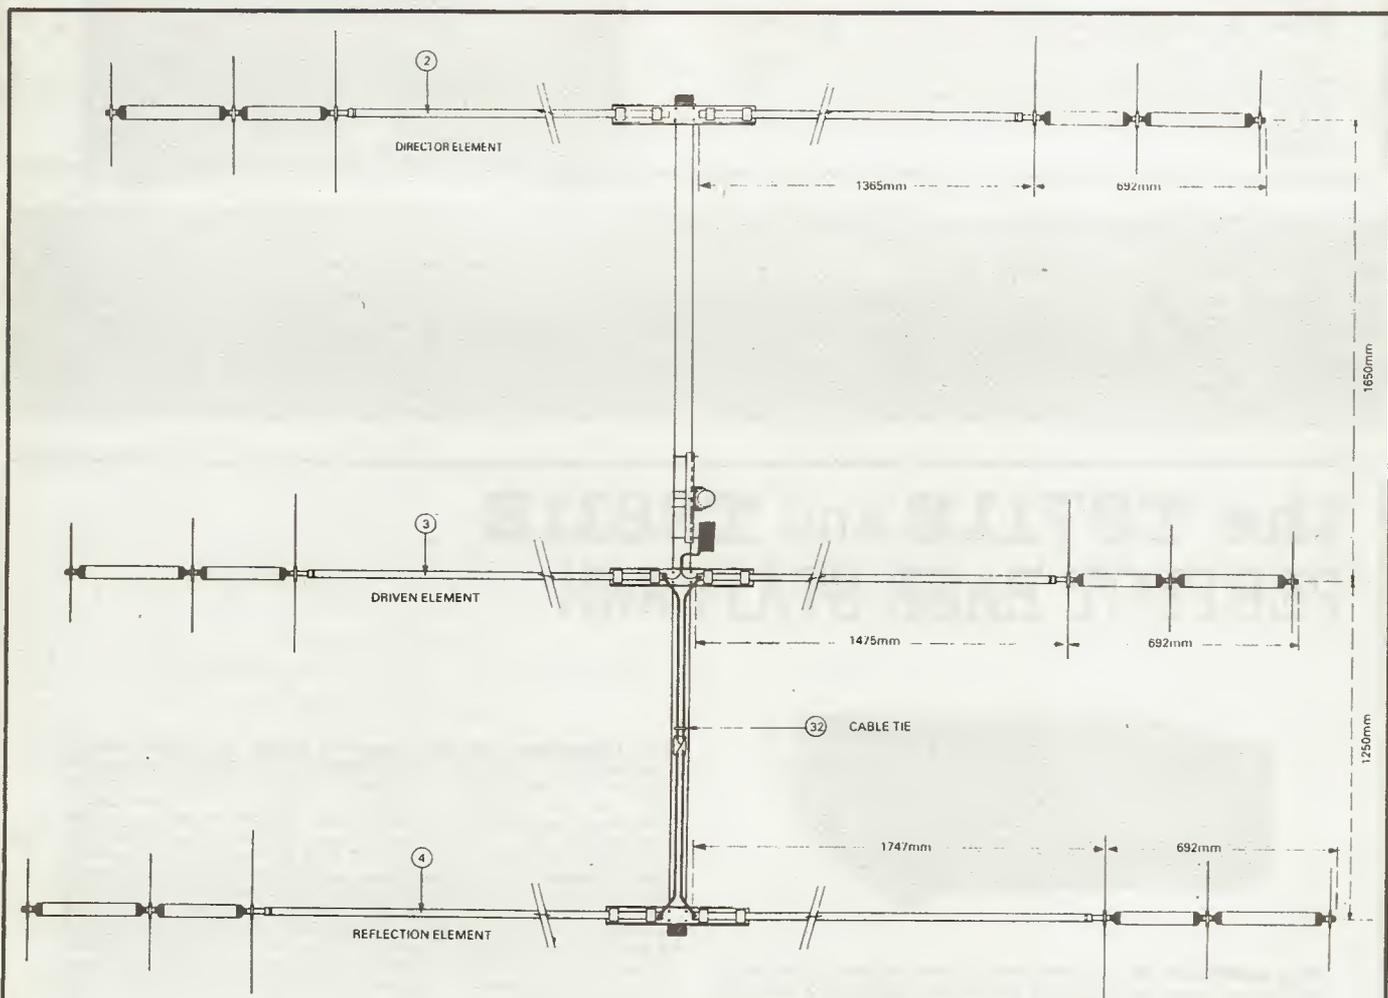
Construction of the MM3 Minimax aerial — viewed from below.
